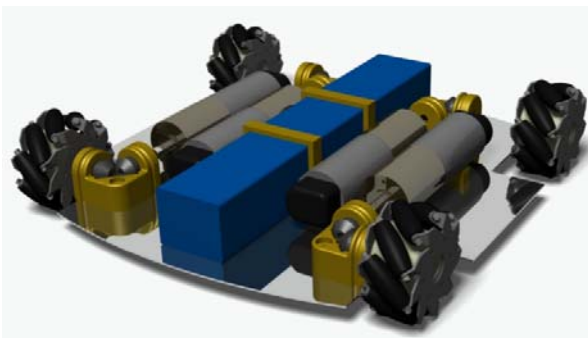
Initial design to transmit movement to the 4 wheels using 4 DC gear motors
